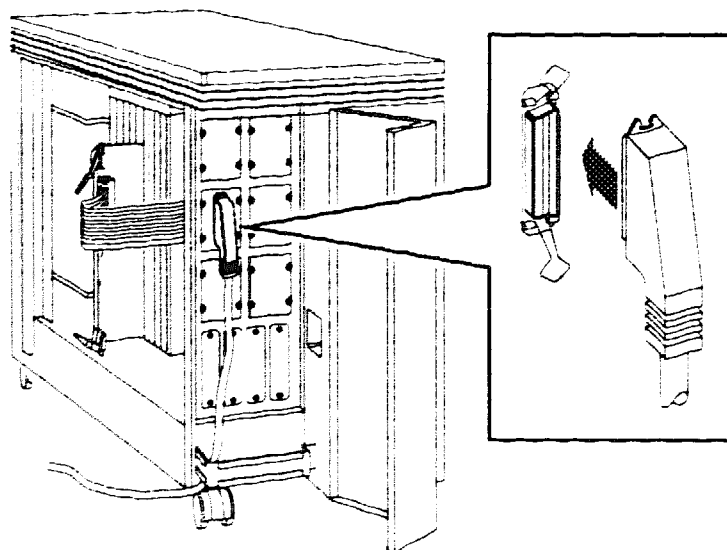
Ribbon Cable Attachment to BA123 I/O Panel
